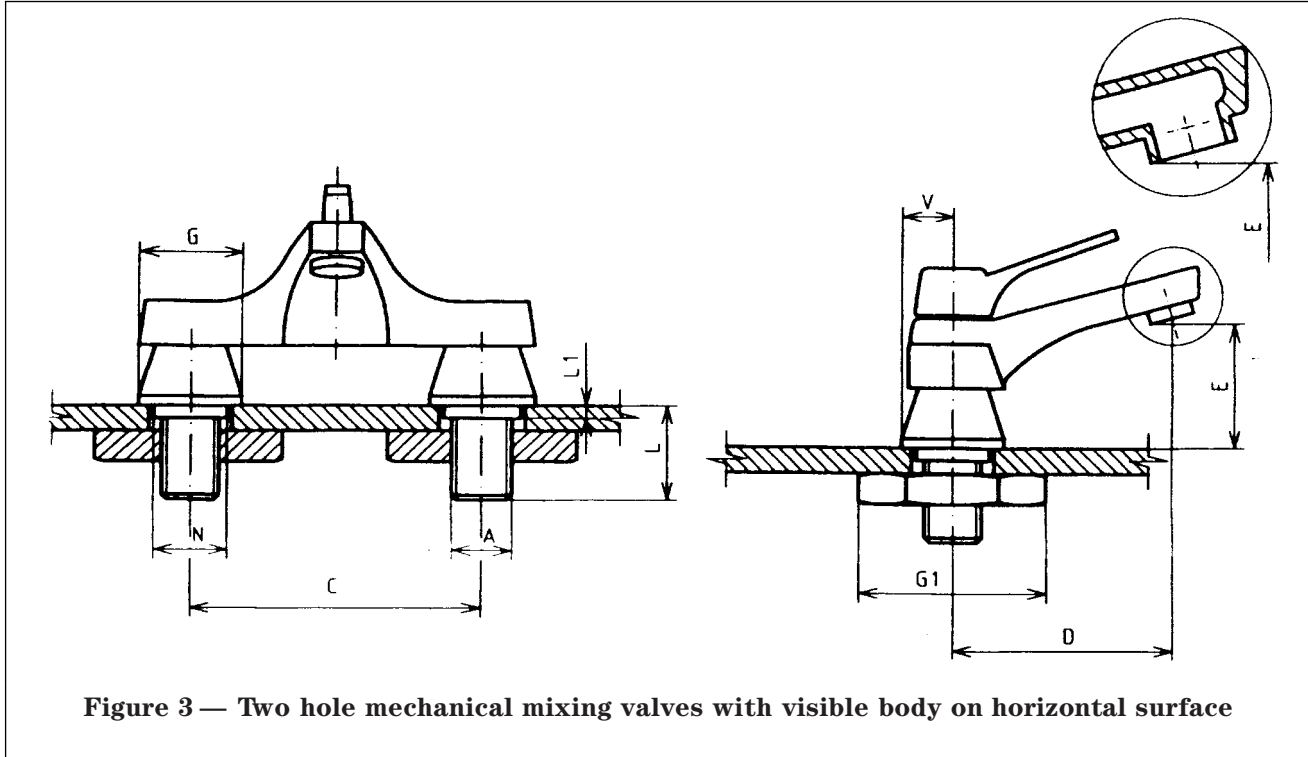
Two hole mechanical mixing valves with visible body on horizontal surface
